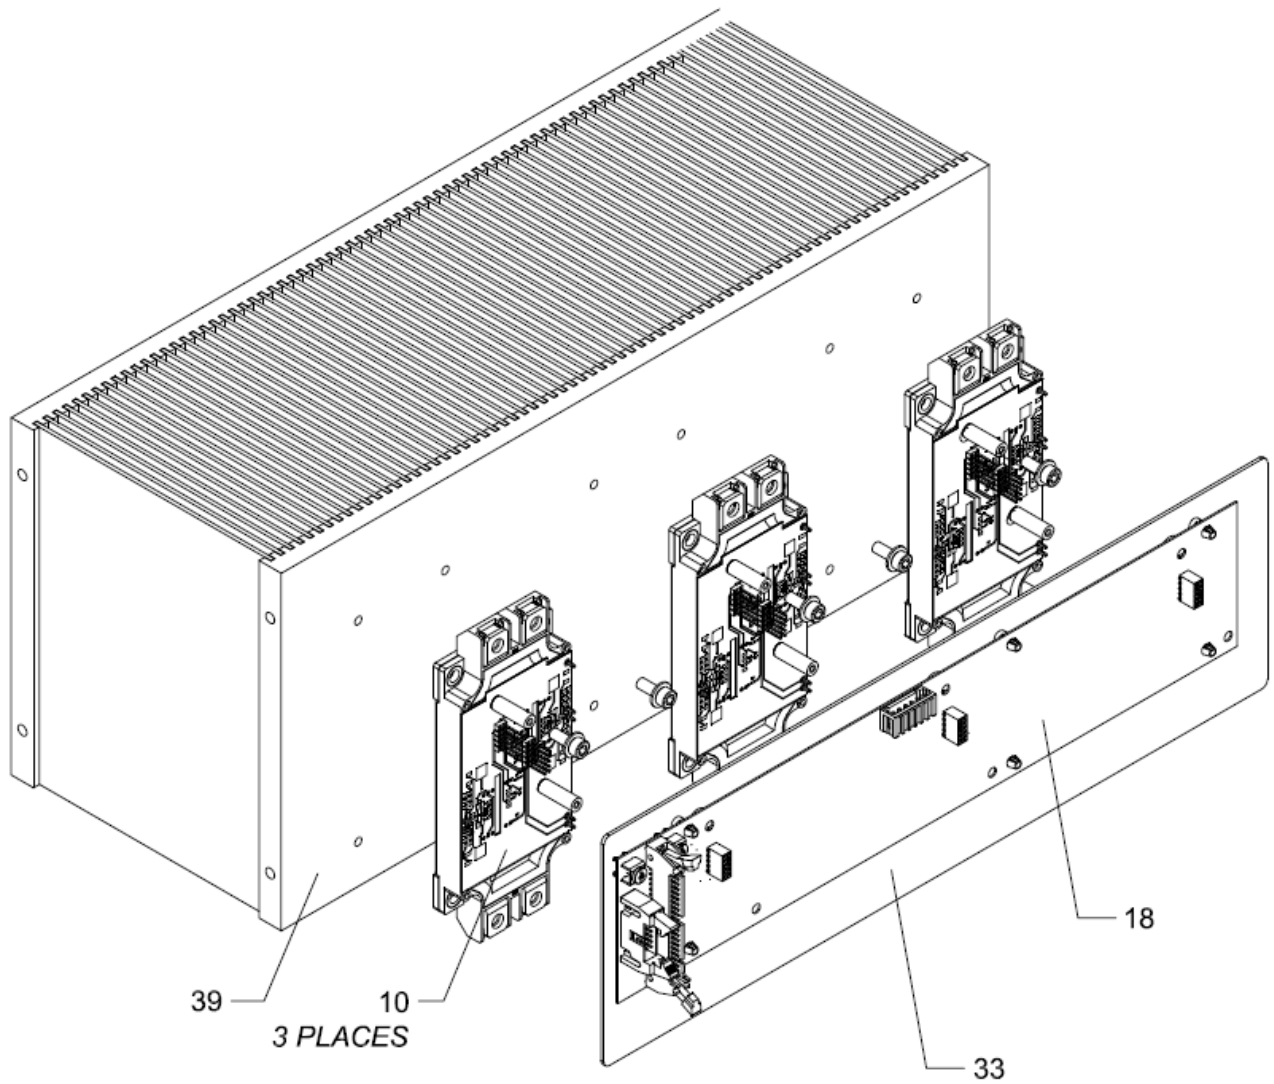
2500+ GPU Illustrated Parts List, Heat Sink PFC
